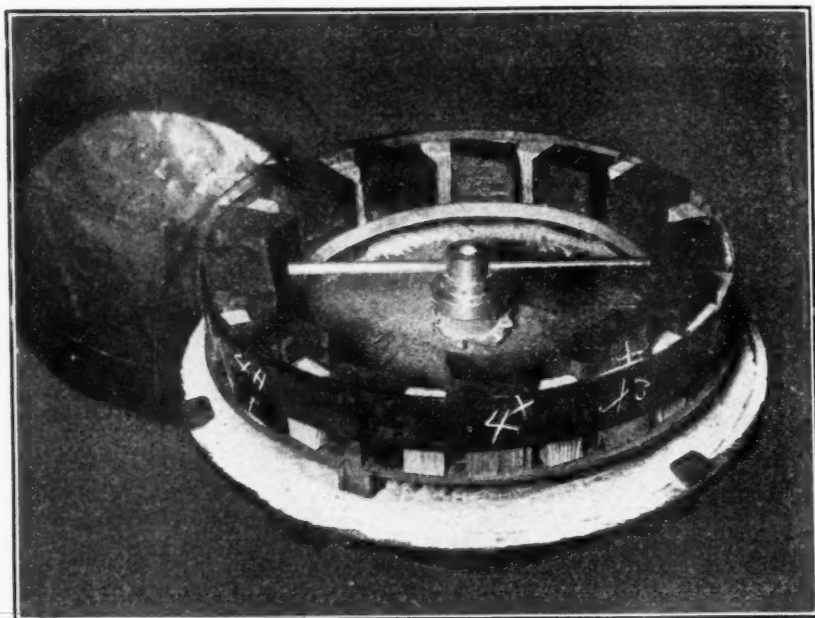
Centrifugal Sand-Blast Machine; Rotating Parts.
